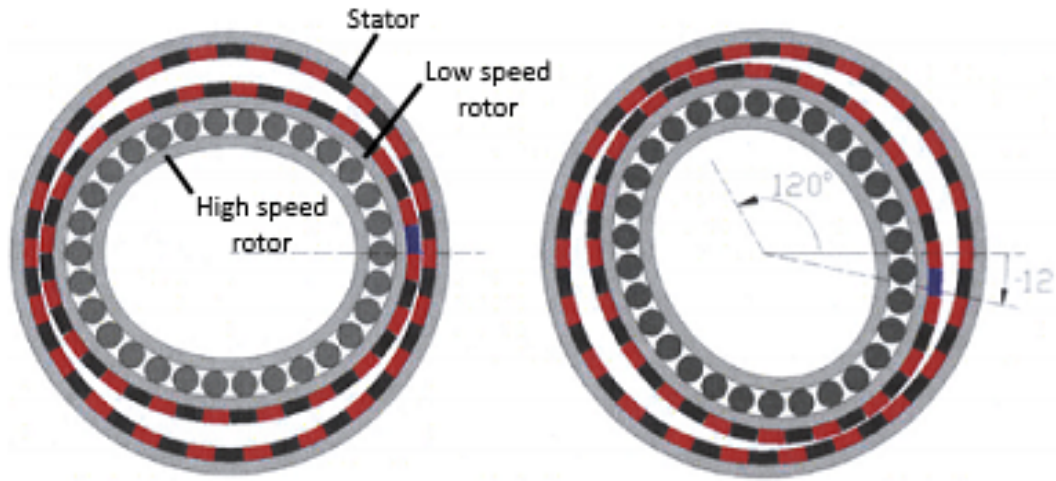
Harmonic gear with 10:1 gear ratio [32]
